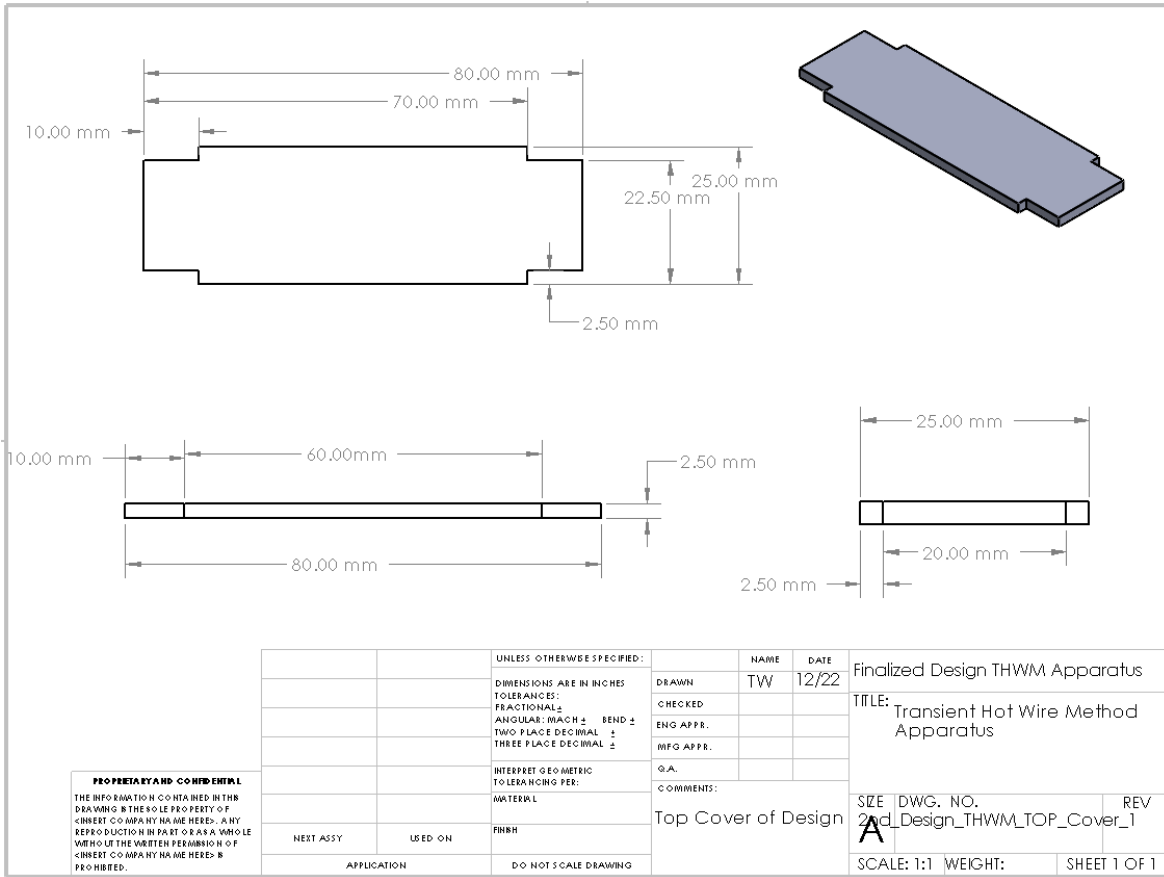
SolidWorks drawing of designed copper apparatus cover
